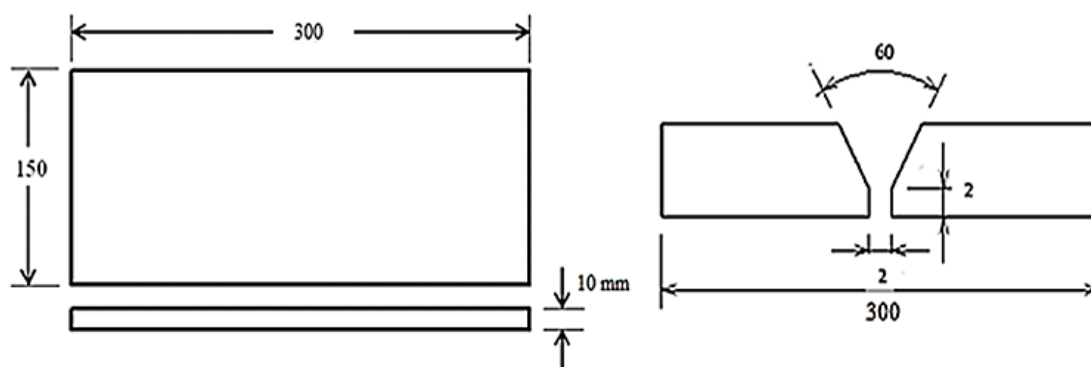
Dimensions of the welding specimen and bevel joint configuration
